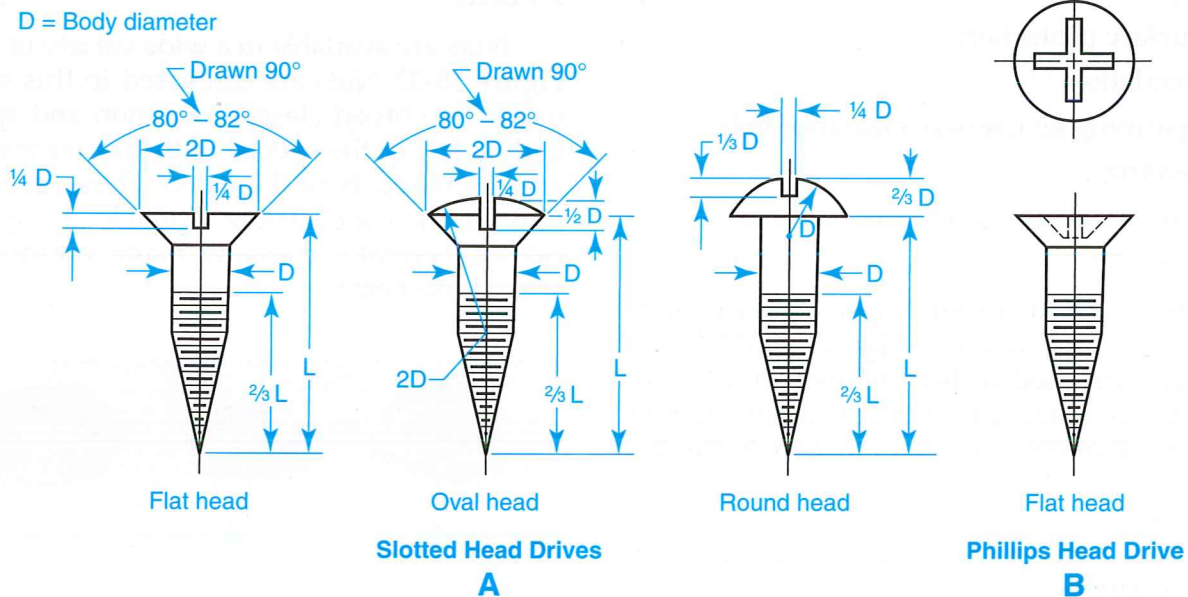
Standard types of wood screws. A—The three standard head types are flat, oval, and round. Shown are slotted head drives. B—The Phillips head drive is common in industrial work.
